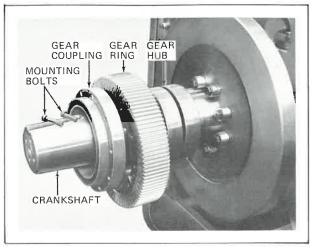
TYPICAL PUMP DRIVE GEAR ASSEMBLY.
